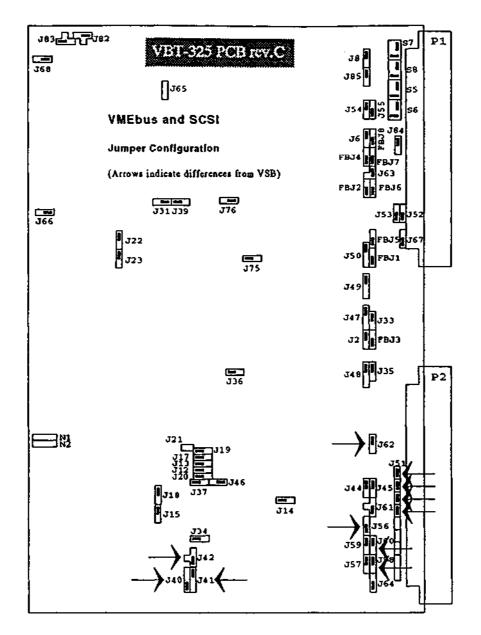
C. Jumper settings for VME and SCSI, VBT-325 PCB rev C.
